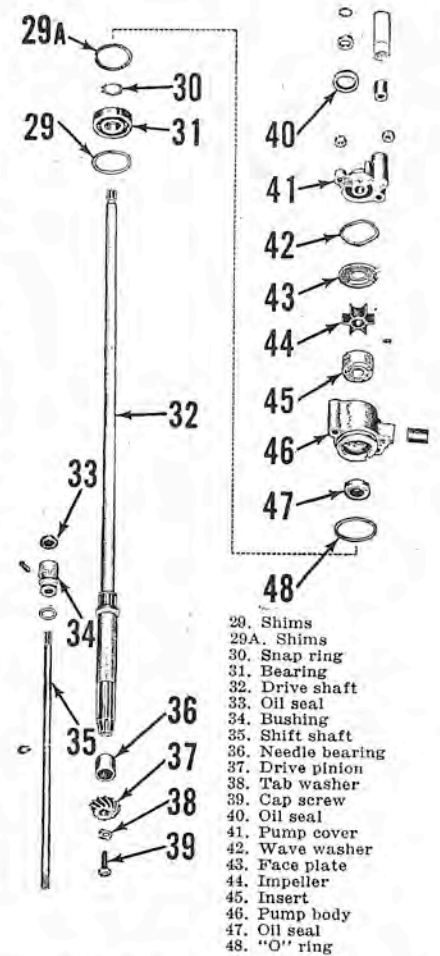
Exploded view of lower unit drive shaft and associated parts. Refer also to Fig. M39.
